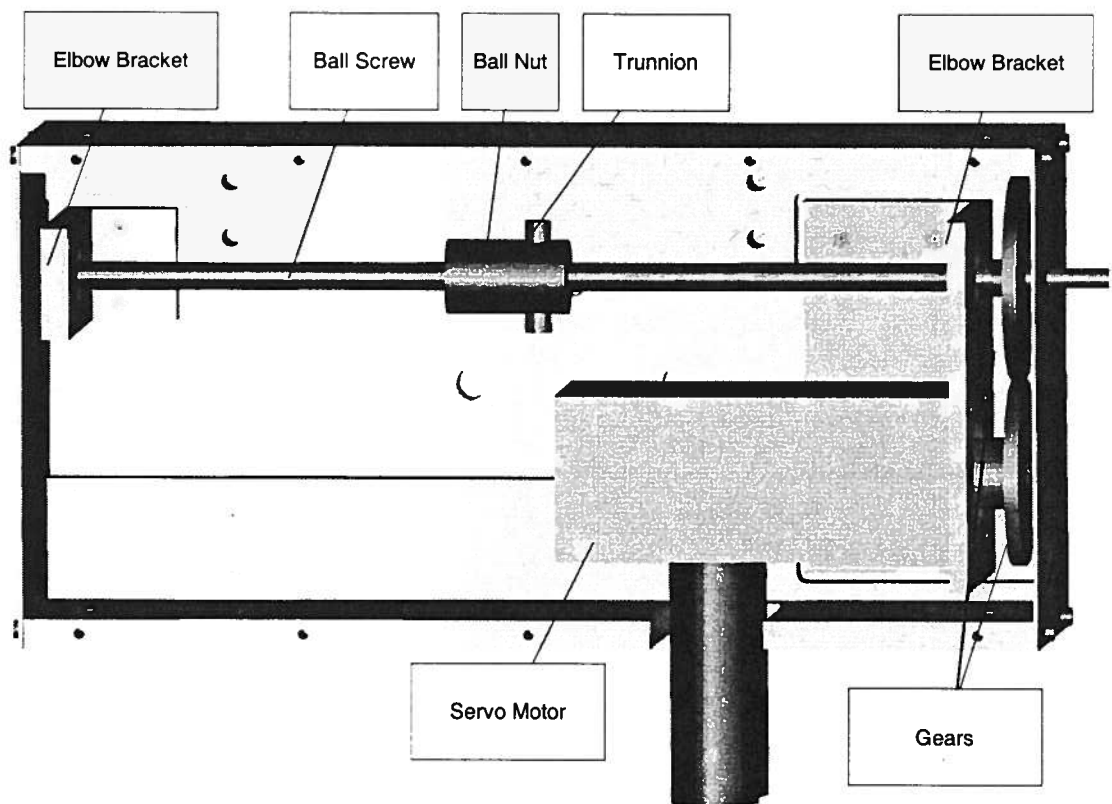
Bottom View of Ground Enclosure with Bottom Panel Removed
